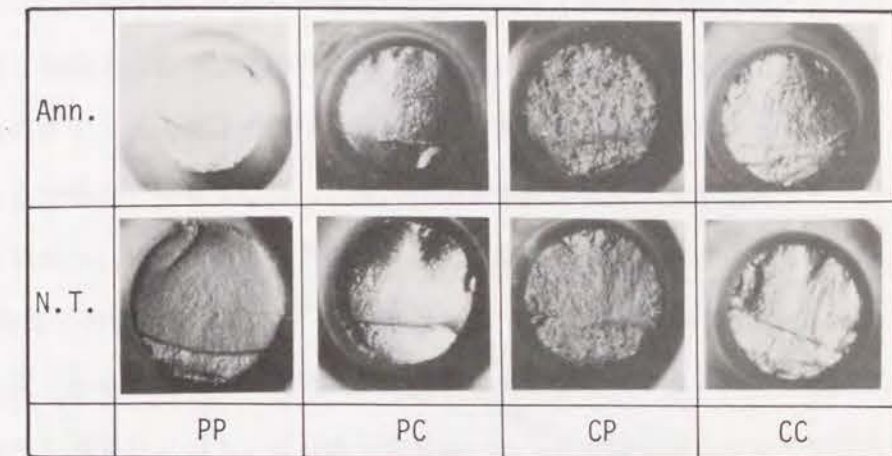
The appearance of fracture surfaces obtained by I J test in a vacuum
